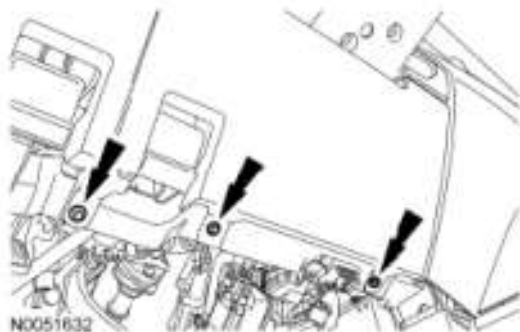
Locating Transmission Fluid Cooler Tube Bracket Bolt
